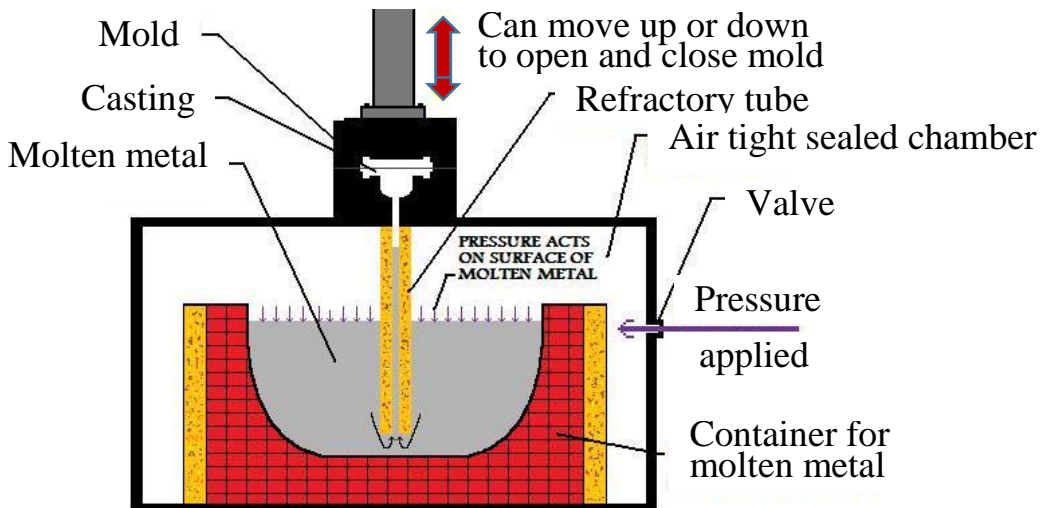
Pressure difference between chamber and mold forces metal to flow up the refractory tube
